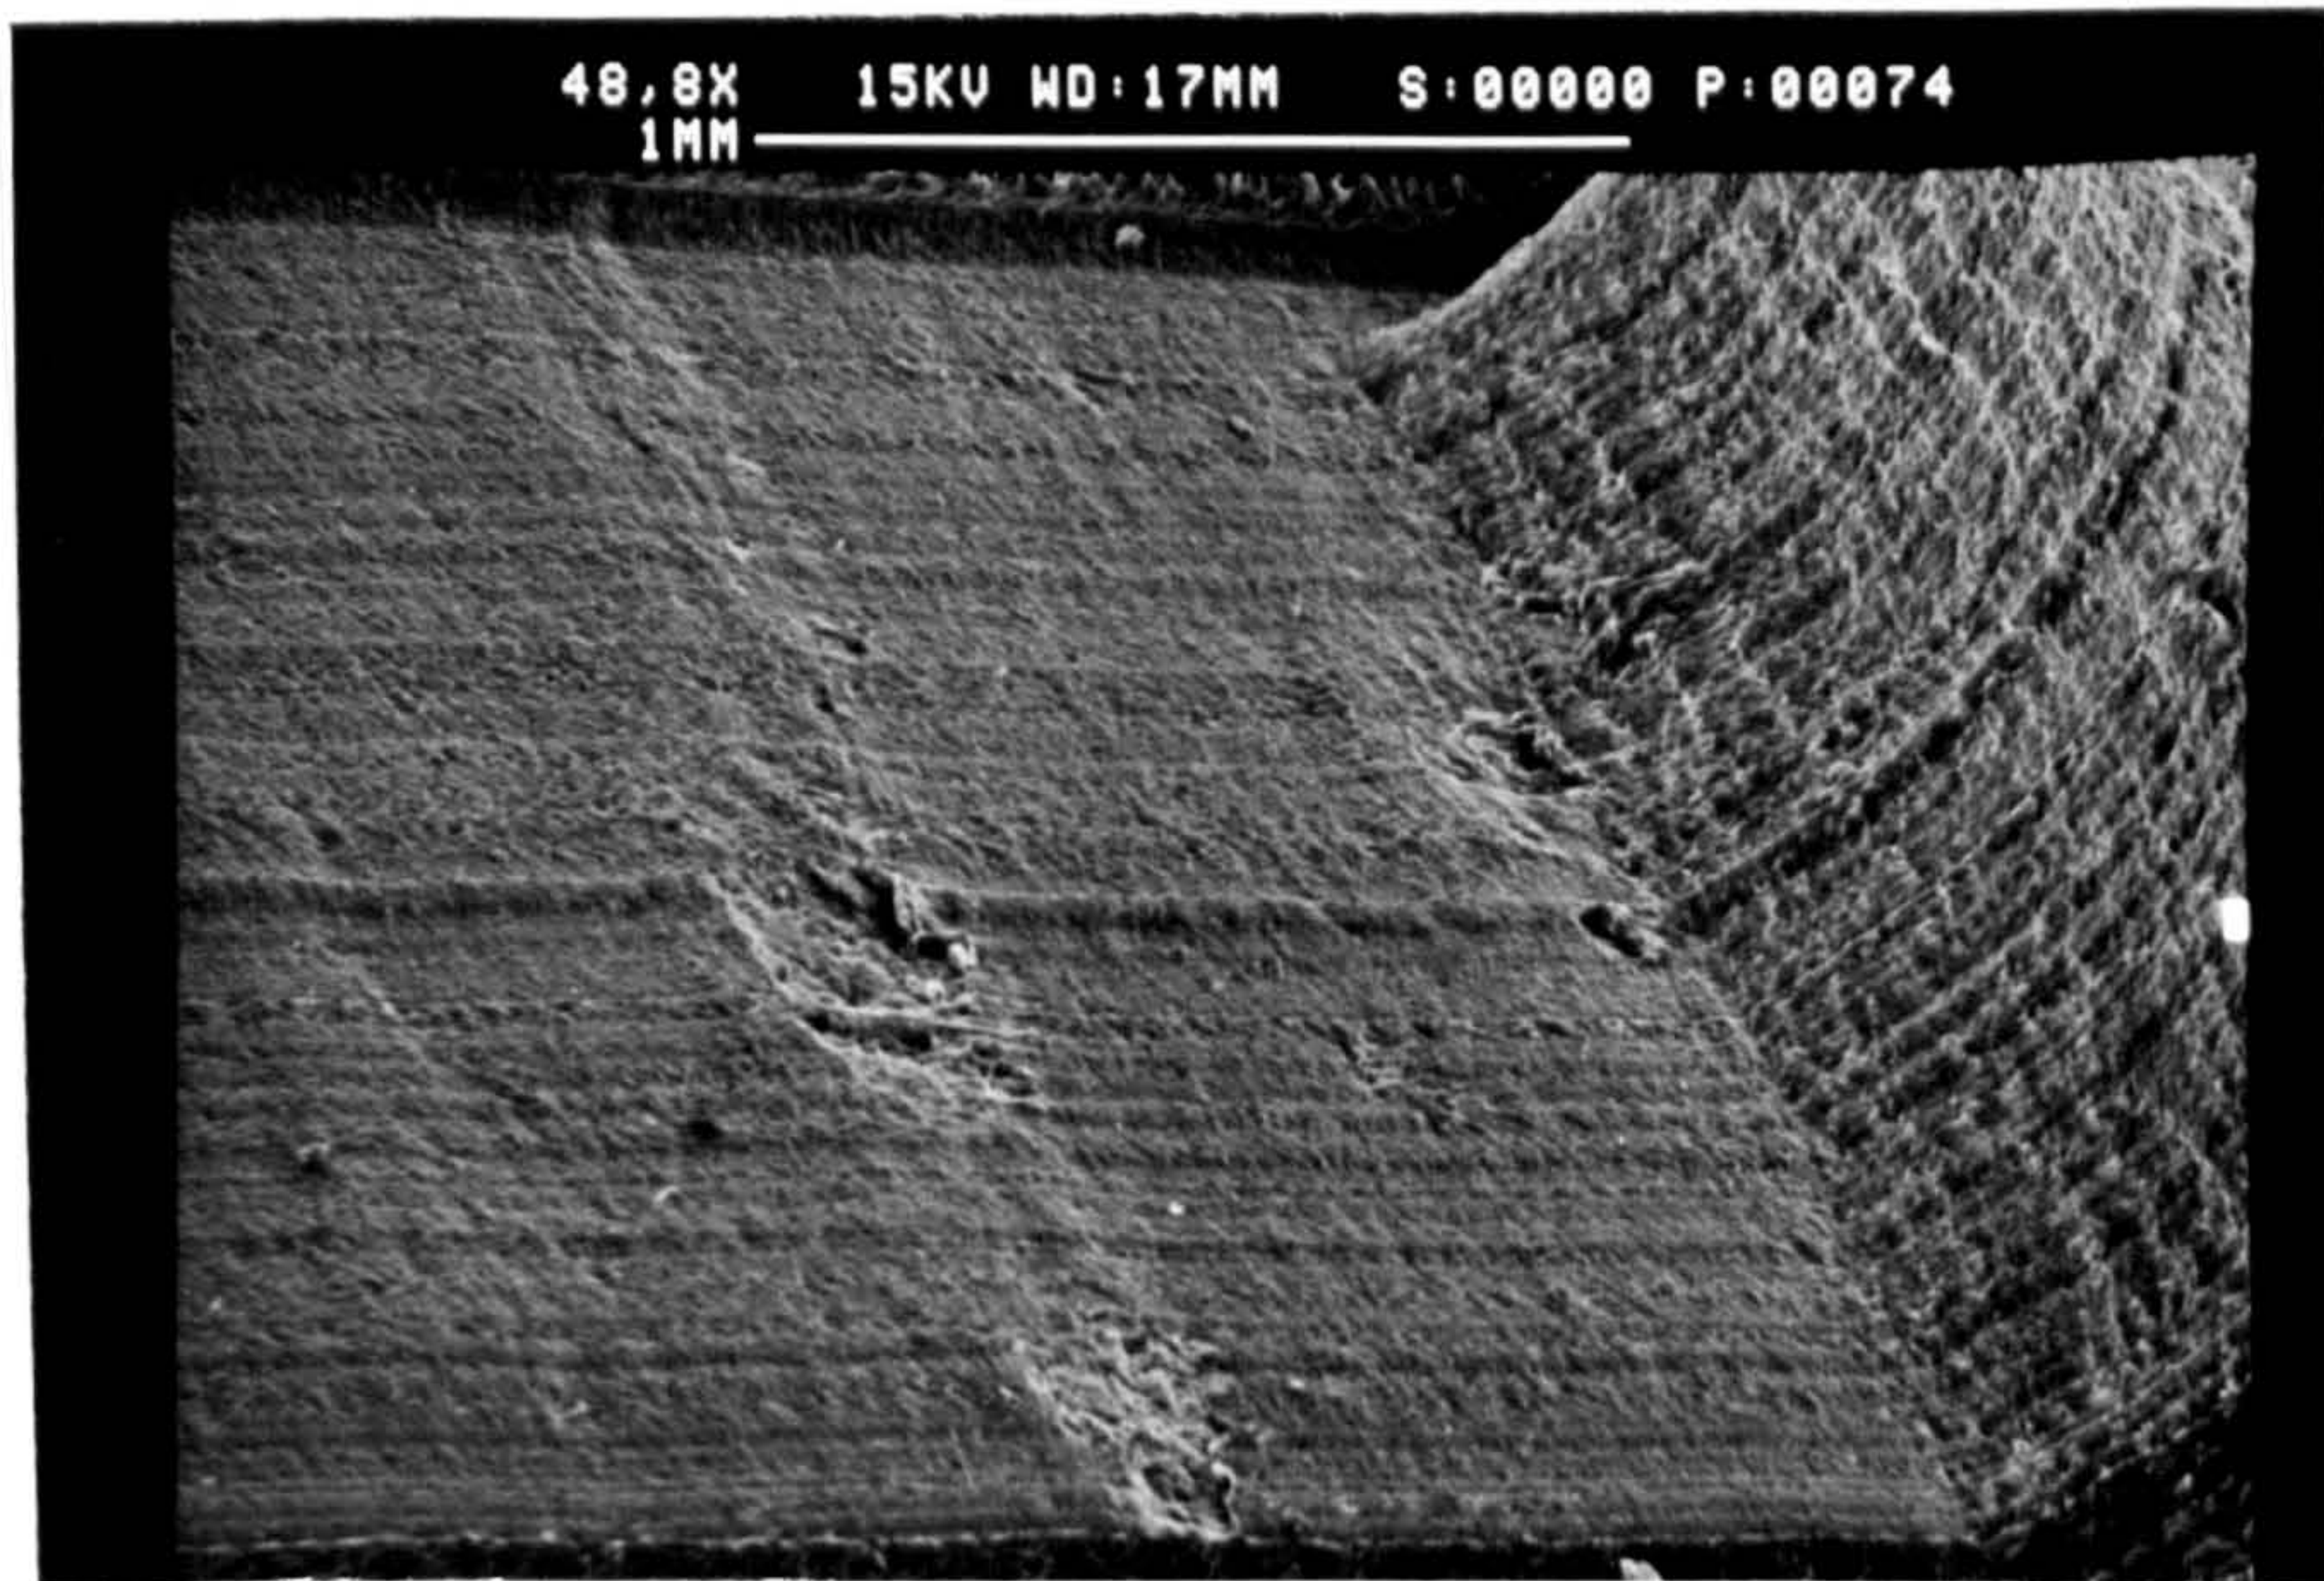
PVC machined surface produced at  $30^\circ$  rake angle showing intermittent fractured areas. (Speed = 30 m/min, feed = 0.25 mm/rev)
